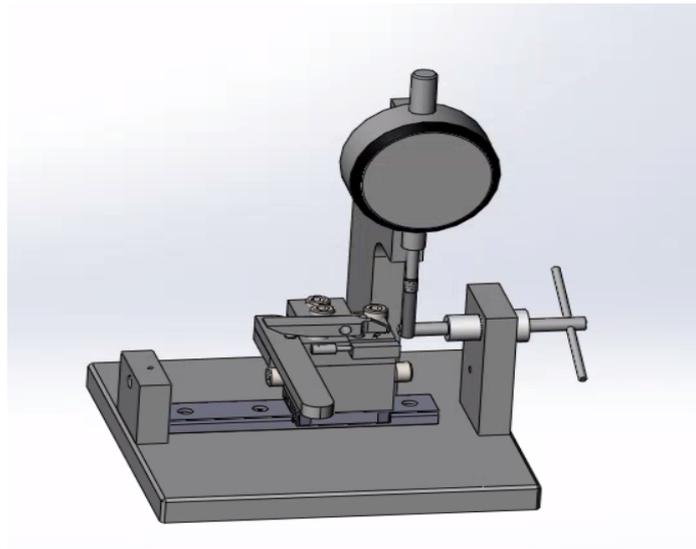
Sensata Technologies 173621 calibration fixture (pre heat treatment). CAD
